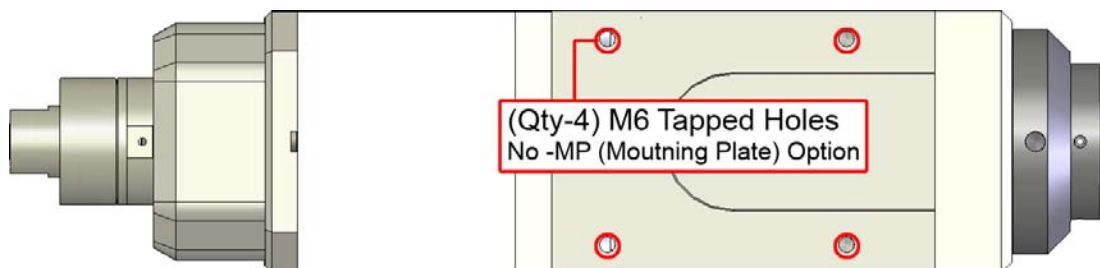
ASR1200 Stage Without Mounting Plate (Bottom View)
